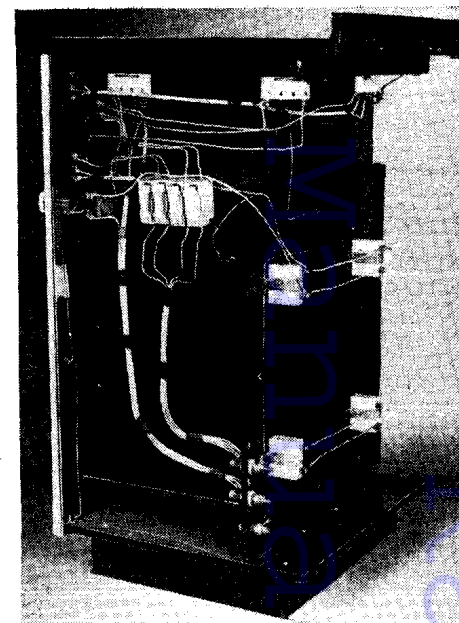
With side and rear panels removed the wiring is fully accessible and the general construction apparent
